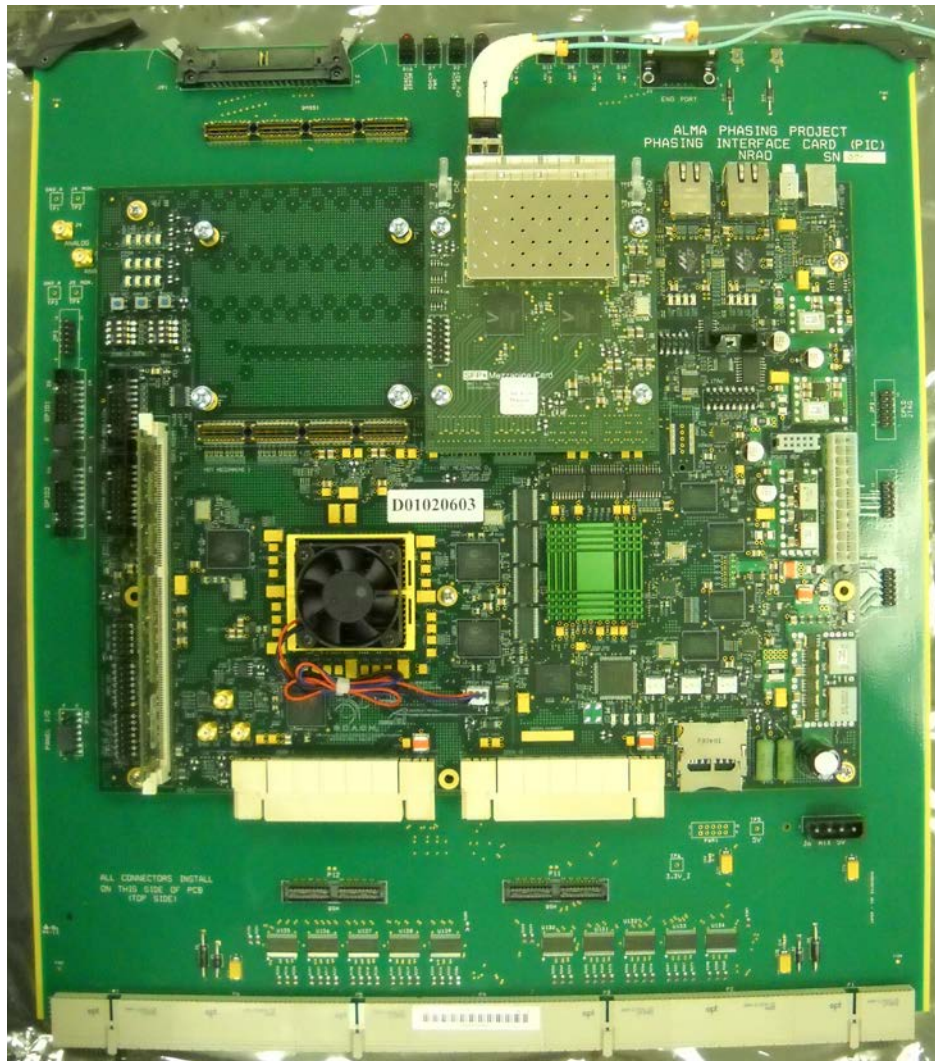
Photo of the Phasing Interface Card Assembly, including the PIC, the ROACH-2, the SFP+ Card and 10GbE cable
